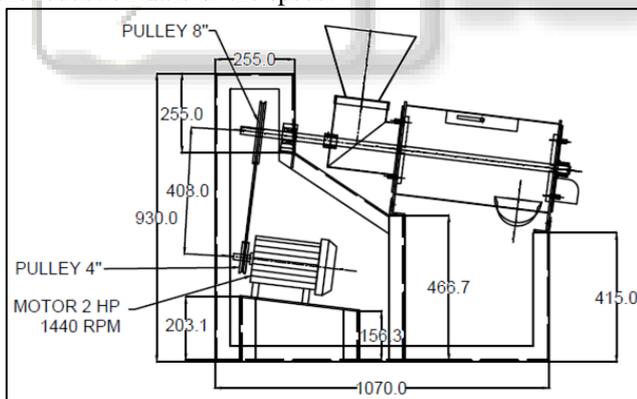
CAD Model of Mango Pulp Extraction Machine
